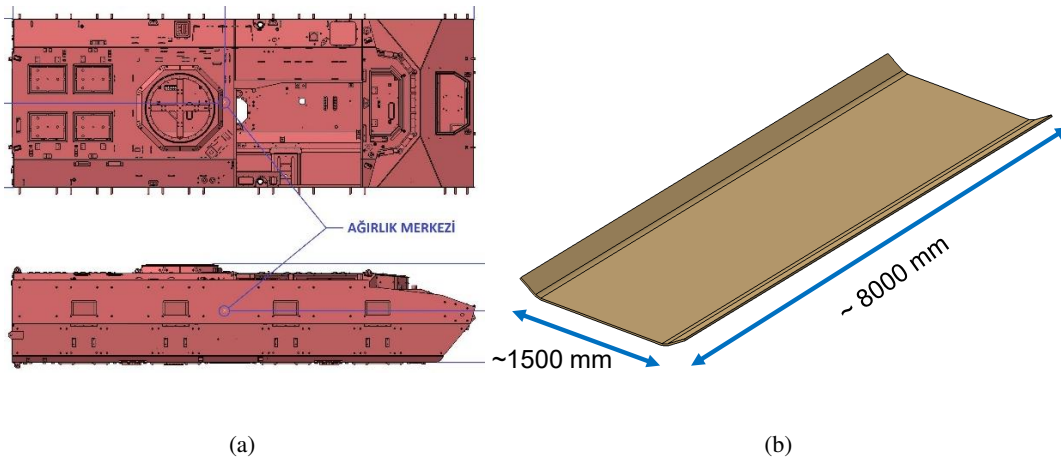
(a) An example of hull design (b) An example of bottom plate design
